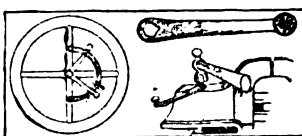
Showing method for tightening a loose throttle control lever. Remove the lever from the car, place it on the axil portion of the vice, strike it a few sharp blows with a hammer, as indicated in the illustration, whereupon, on refitting the lever to the end of the rod, instead of fitting loosely, it will be necessary to force it on by tapping it into place with a hammer; the nut then be replaced and the trouble eliminated.
